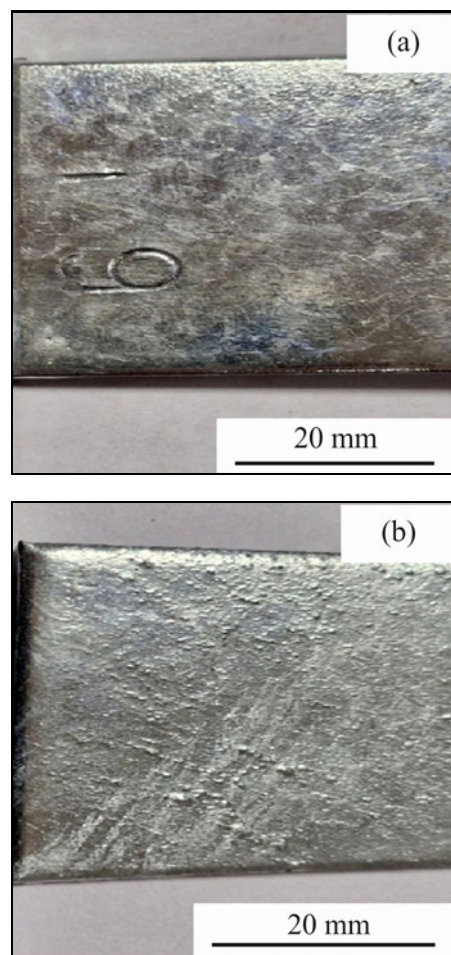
Coated samples: (a) defect-free and (b) with surface defect.
